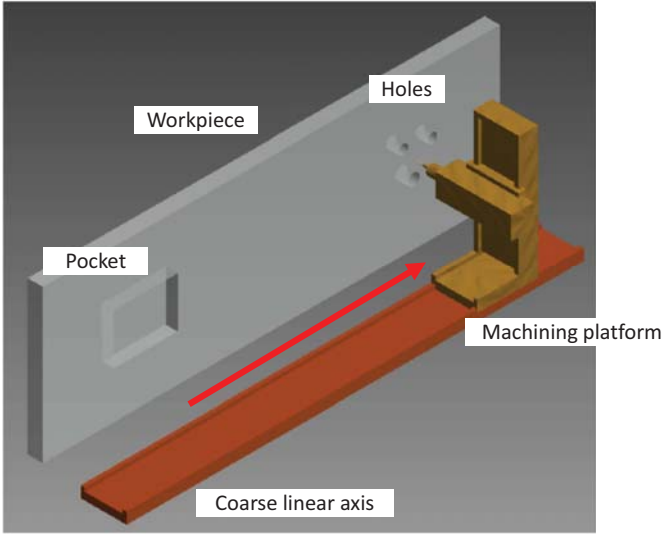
Concept of a portable machine tool with a coarse linear axis. Each set of local features, holes and a pocket, is machined by the machining platform. The coarse axis is not engaged in the machining operation.
